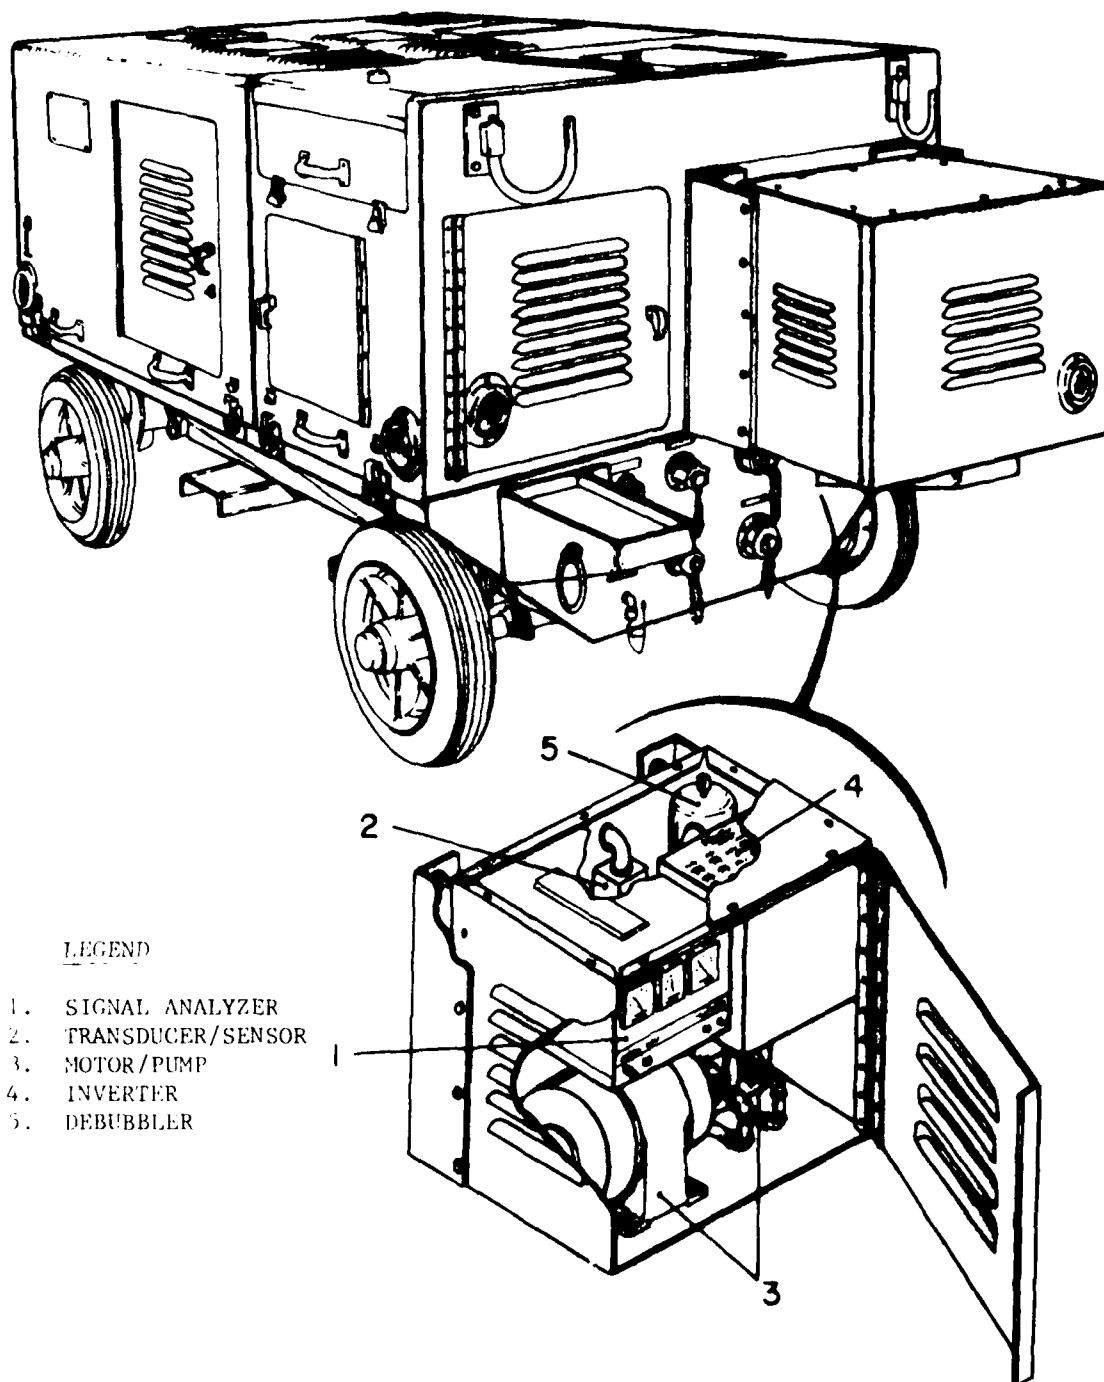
Contamination Monitor Arrangement on AHT-64 Test Stand
